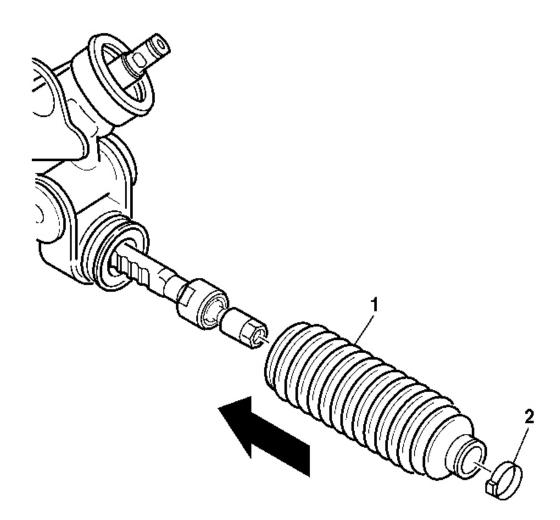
View Of Boot & Inner Tie Rod End Courtesy of GENERAL MOTORS CORP.
